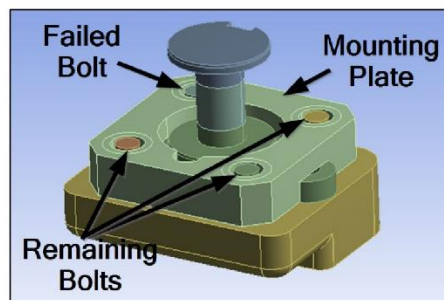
Isolation Valve Mounting Plate Failsafe Bolt Condition
